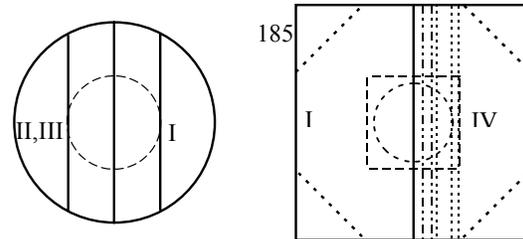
Blank geometry with possible weld positions (see below), punch (square) & hole(round) shown as dashed lines
